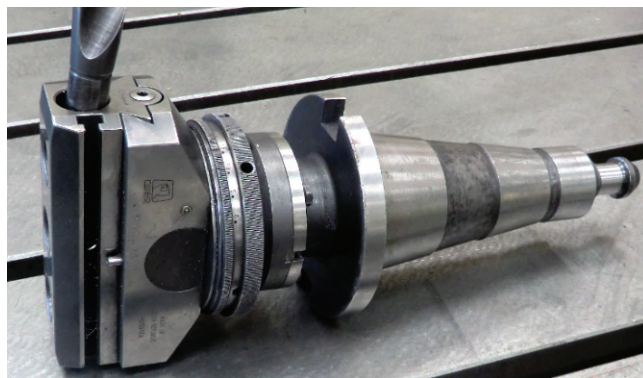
Universal boring head Vhu 125 of the NAREX company with a boring knife mounted [6]
